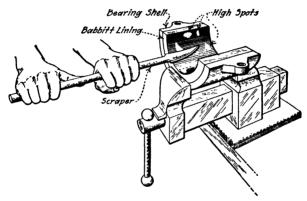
Illustrating the method of scraping a split type bearing. (Southern Engineer.)
